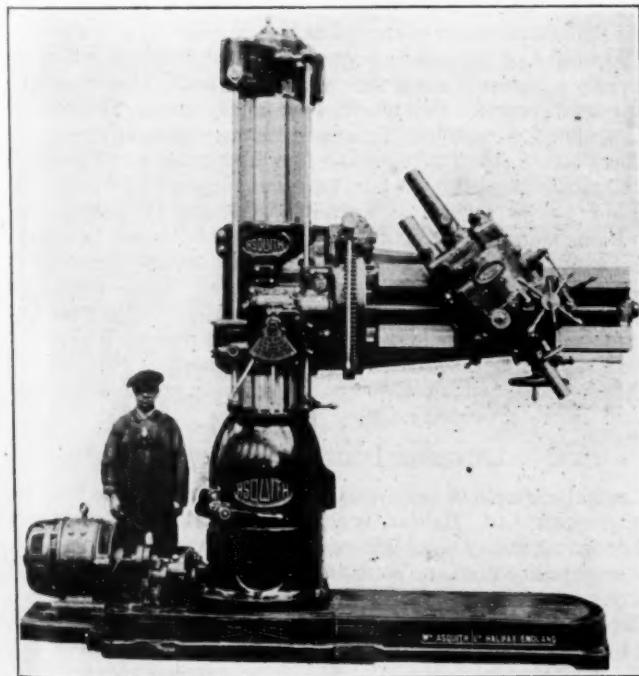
UNIVERSAL TYPE RADIAL DRILL OF SPECIAL HEAVY DESIGN
